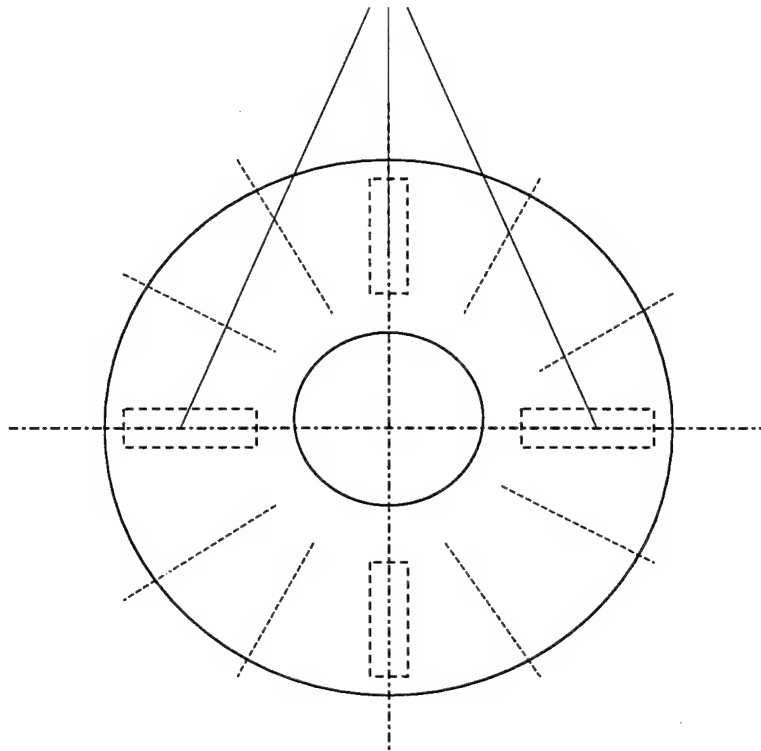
Schematic of radially rotating heat pipe cooling for a turboengine disc.
